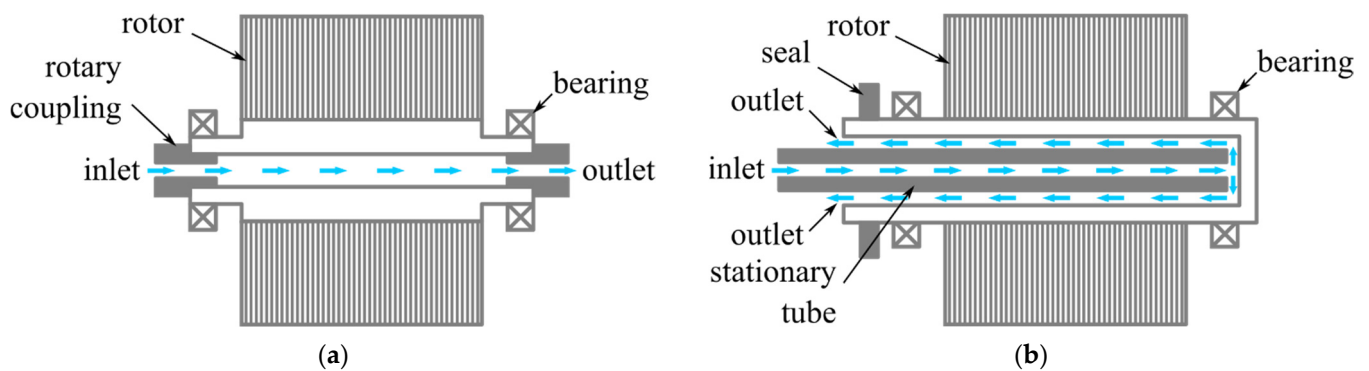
Hollow shaft oil-cooling method [107]: (a) hollow-shaft; (b) recirculating hollow-shaft structure.
